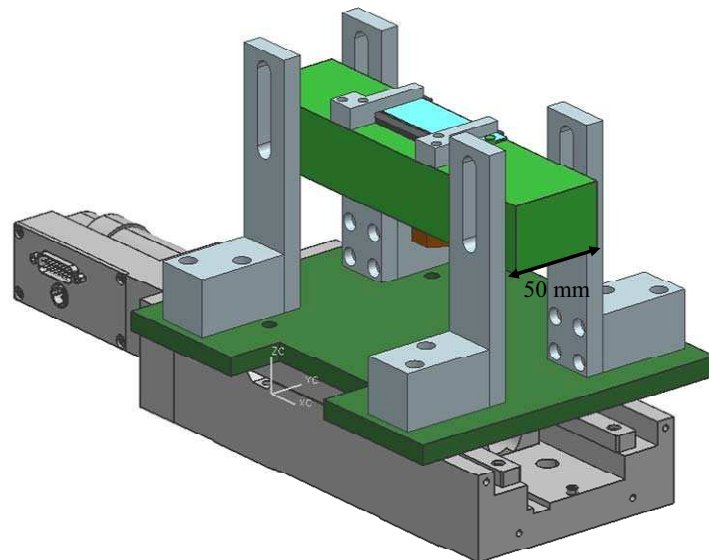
The slide holder and the motor. The slide is mounted in the slide holder so slide can be repetitively mounted in the same position. The slide motor is also high precision motor, so the chip can print particles correctly onto the slide.
